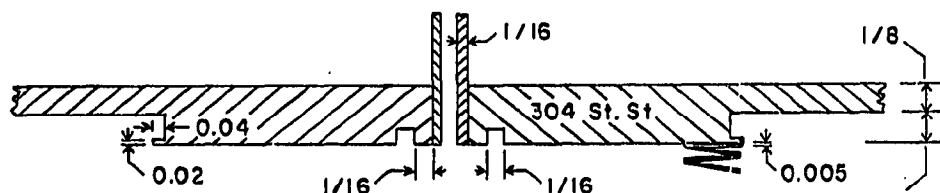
Cross-section of top plate and gas inlet showing design necessary for arc welding. Dimensions are in inches.
